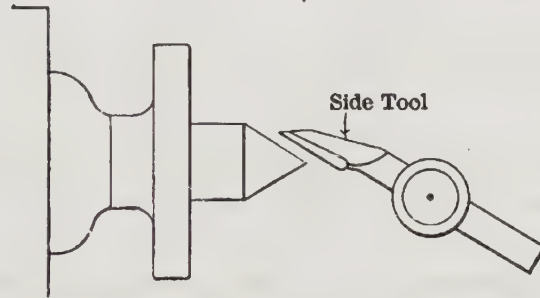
Use of a Side Tool for Truing the Live Center.
